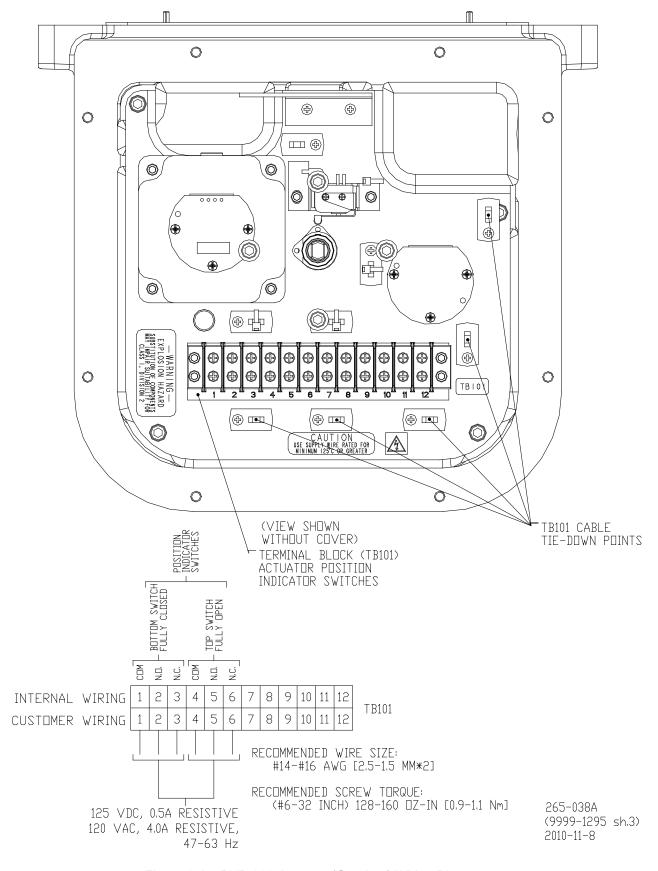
RVP-200 Actuator (Gearbox) Wiring Diagram
